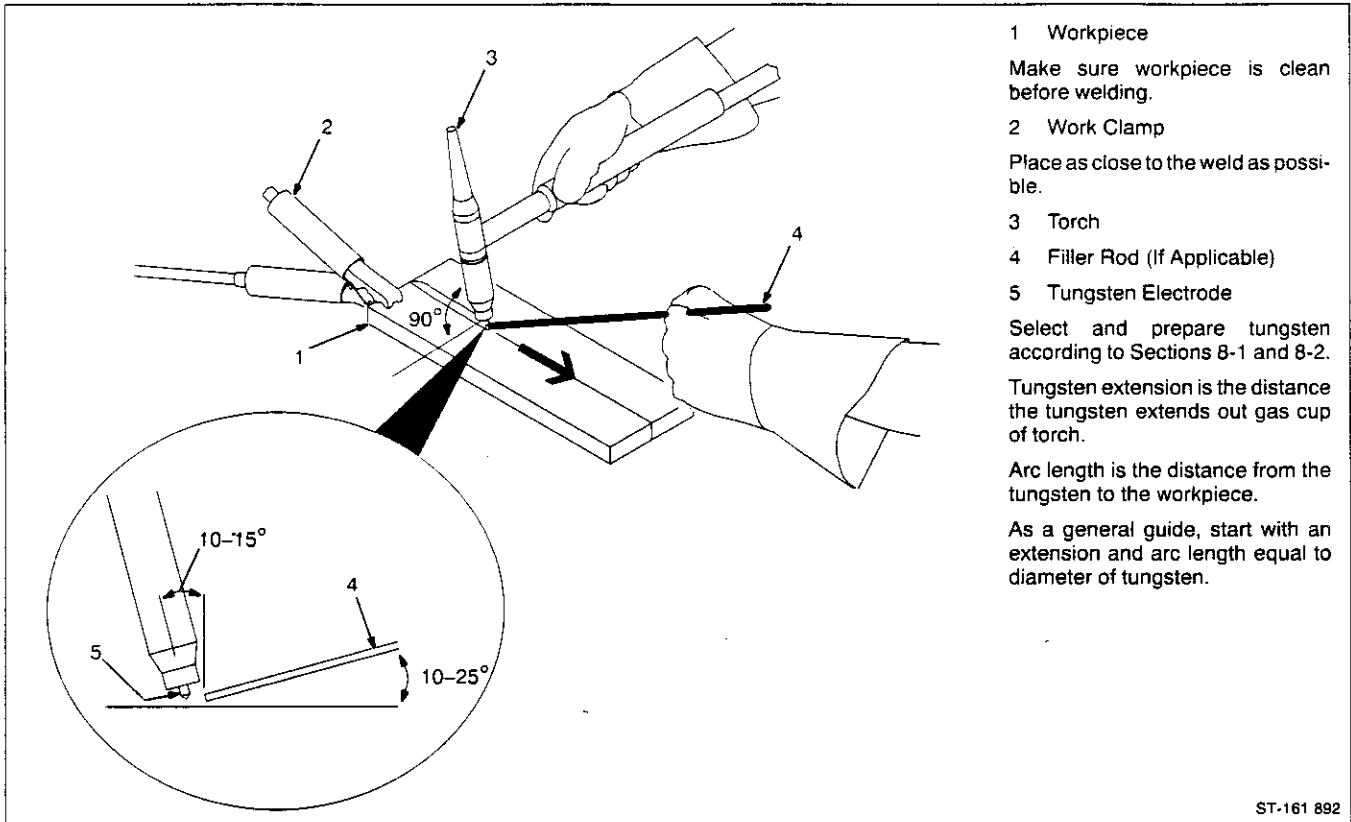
Gas Tungsten Arc Welding (GTAW) Positions
